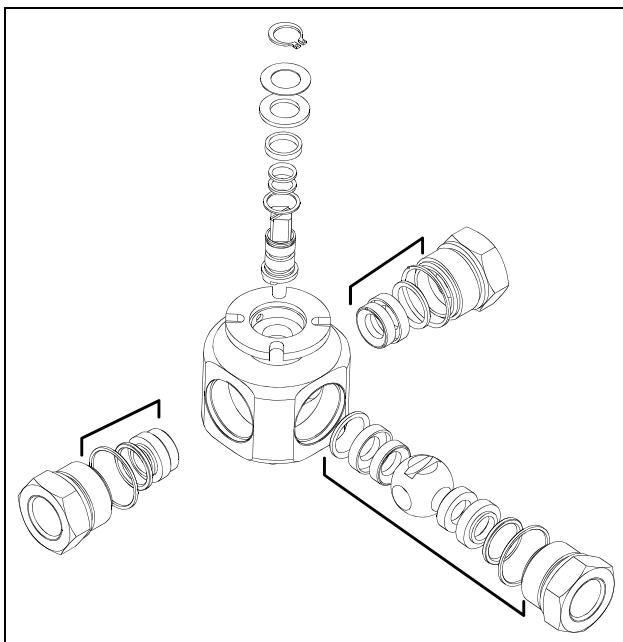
Old gaskets of ball valve. Remove all parts indicated here with a bracket, and replace them with new ones. Note that the new gasket set contains fewer parts than the old one – do not reuse any old parts!
